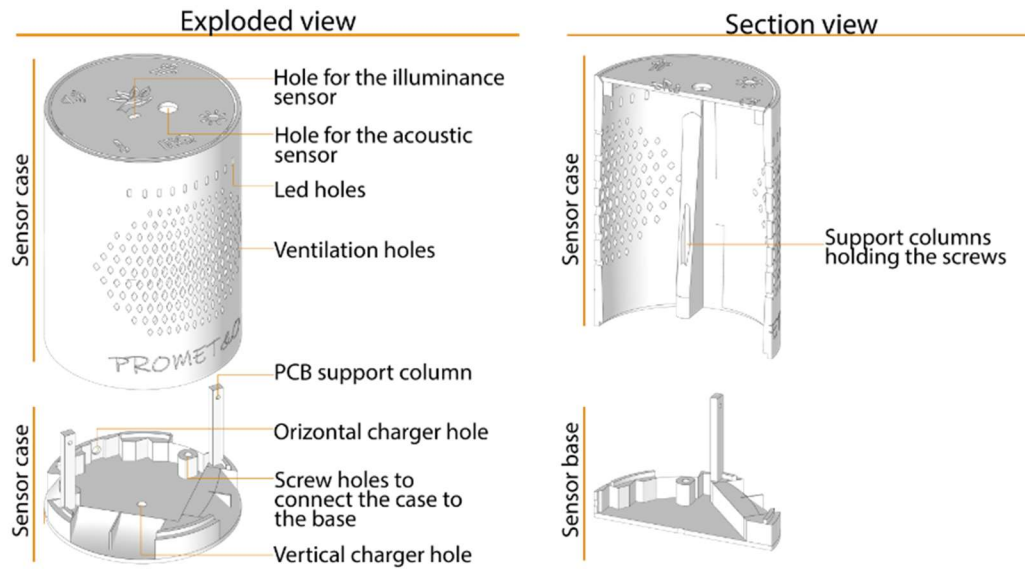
Exploded and section view of the multisensor case. Taken from (Bevilaqua D. ,2023)
